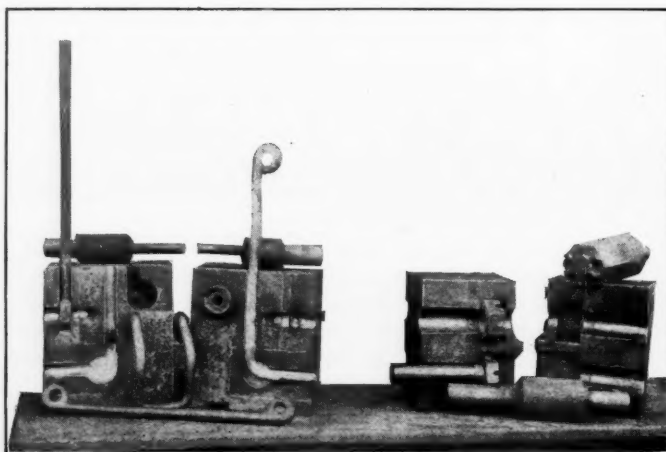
Dies for Upsetting and Punching Brake Hanger Ends and Forging Castle Nuts.
